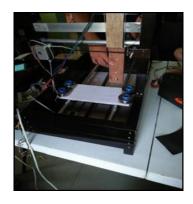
Fixing Motors in the Body Frame and Putting Belts and Platforms and other parts
